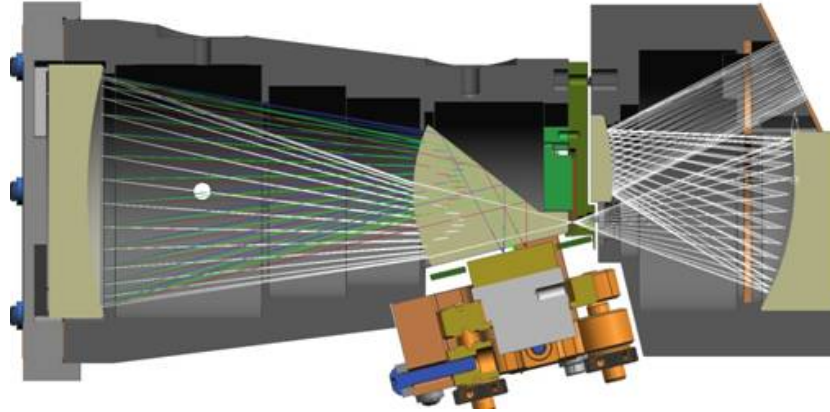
Optomechanical bench assembly. A baffle tube is omitted from the input side.
